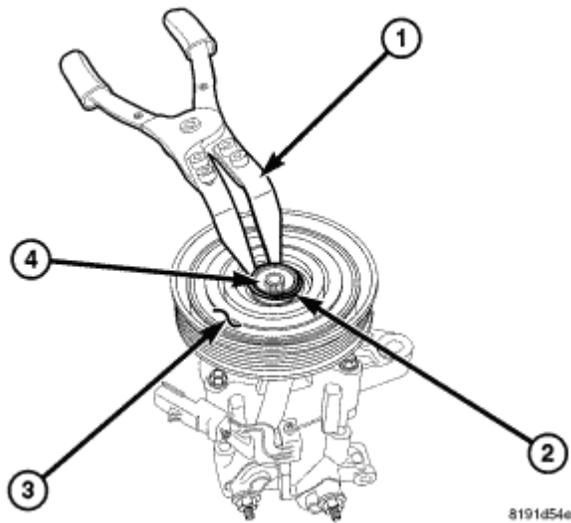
Using Snap Ring Pliers To Remove/Install Snap Ring That Secures Pulley And Bearing Assembly To Front Of A/C Compressor
